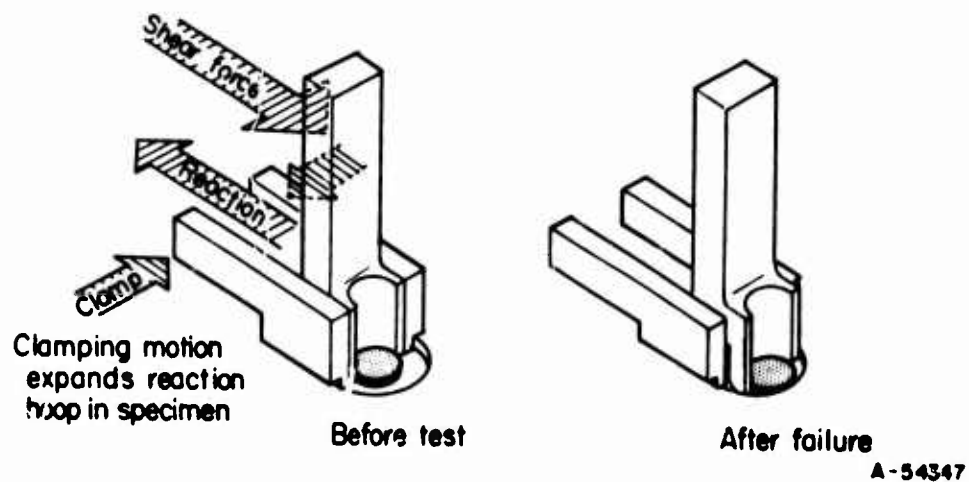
SCHEMATIC DRAWING OF PORTASHEAR SHEAR MECHANISM (REF. 65)
